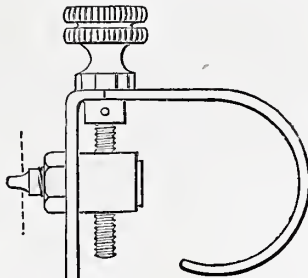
Simple Form of Adjustable Index Spring: Side View.
